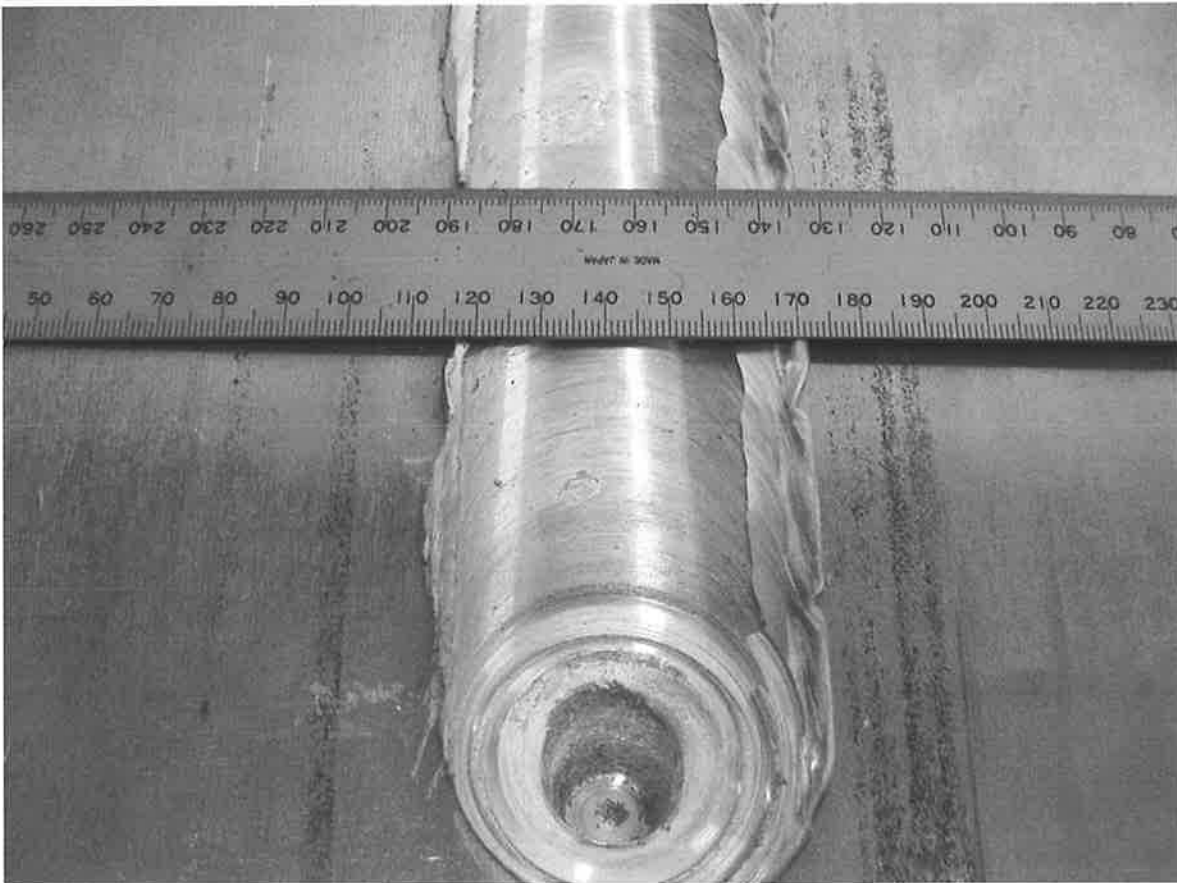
Weld 822A produced in 25mm thick 5083 H111 alloy using tool pin CT2-20. Note no defect could be seen in the region of the exit hole.
